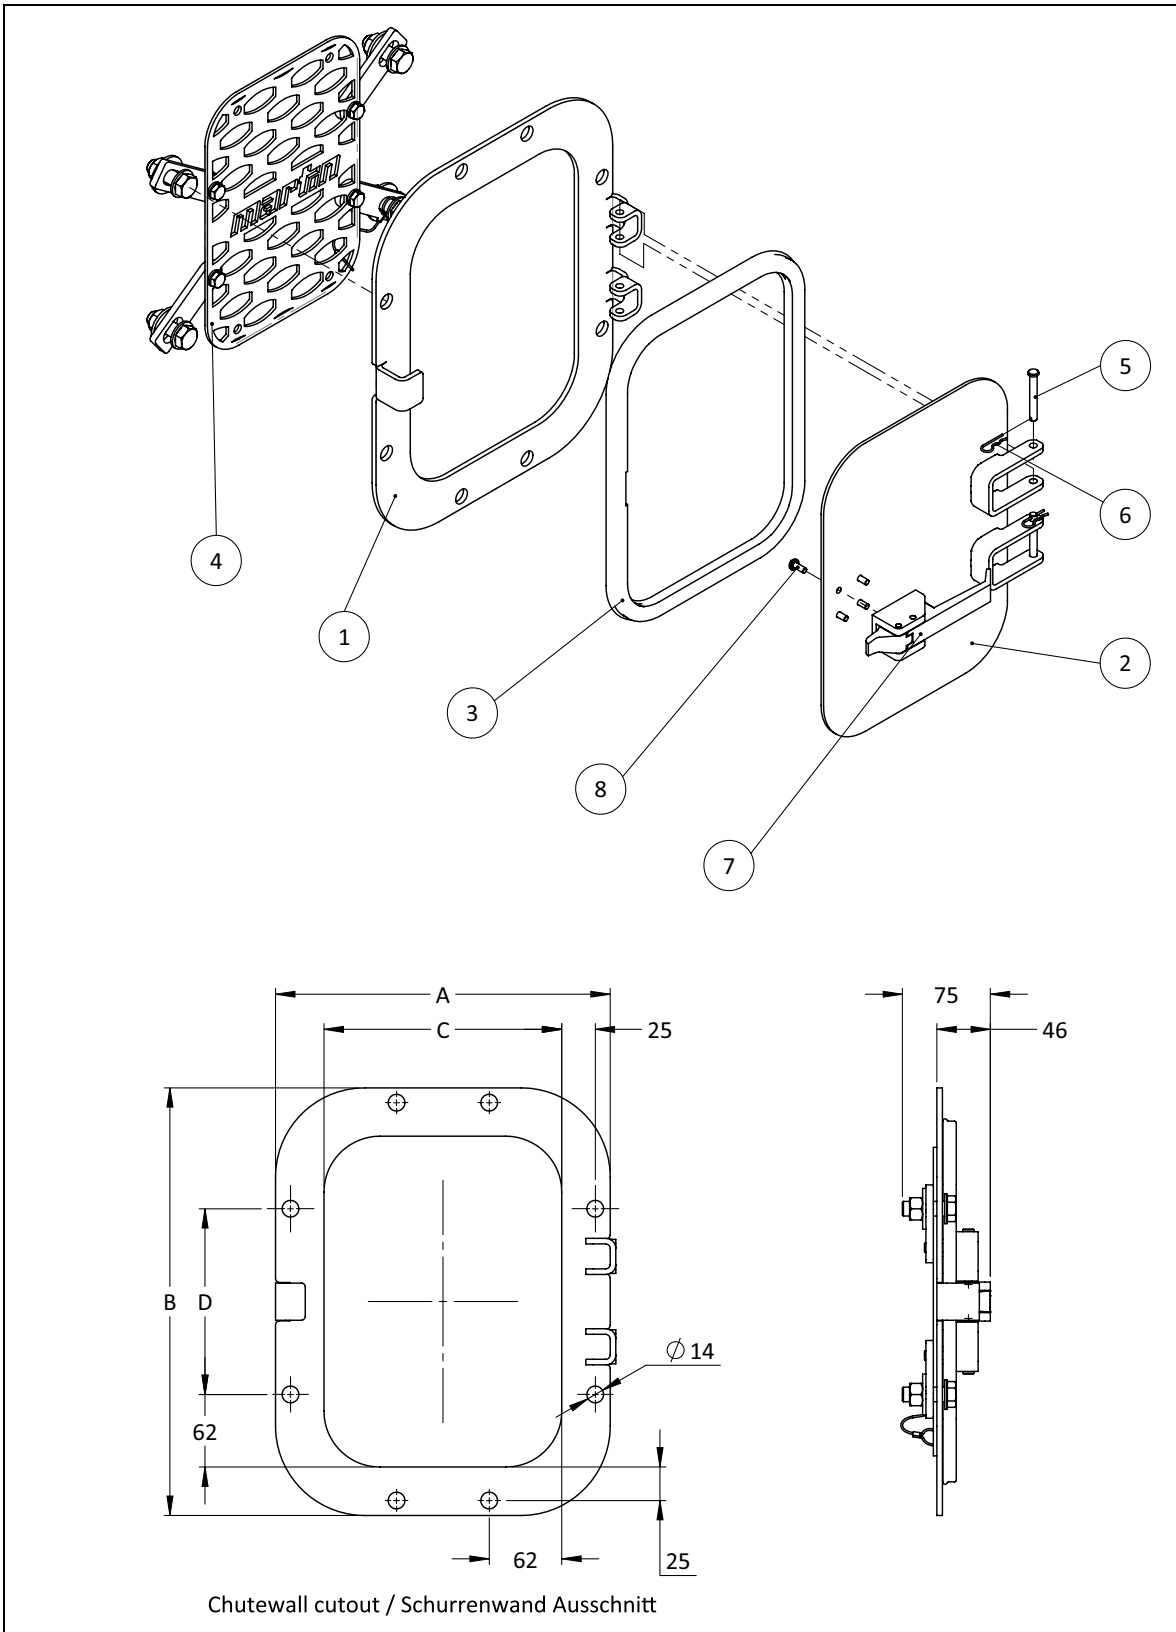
Martin® Inspection door with steel door (Handle lock)
